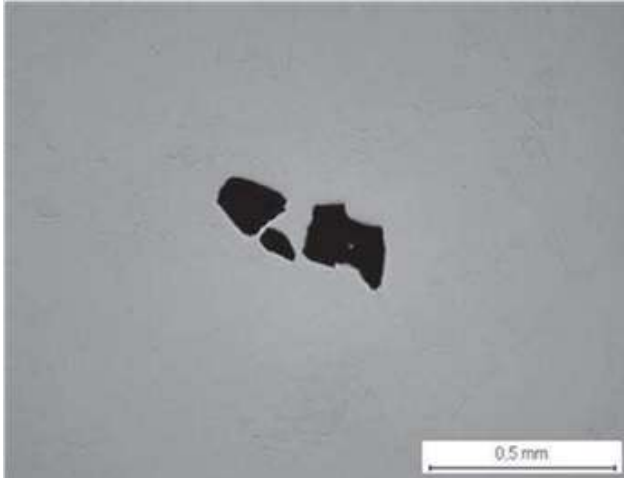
Pores in the overlap zone of a 50 mm thick copper FSW weld [21]
